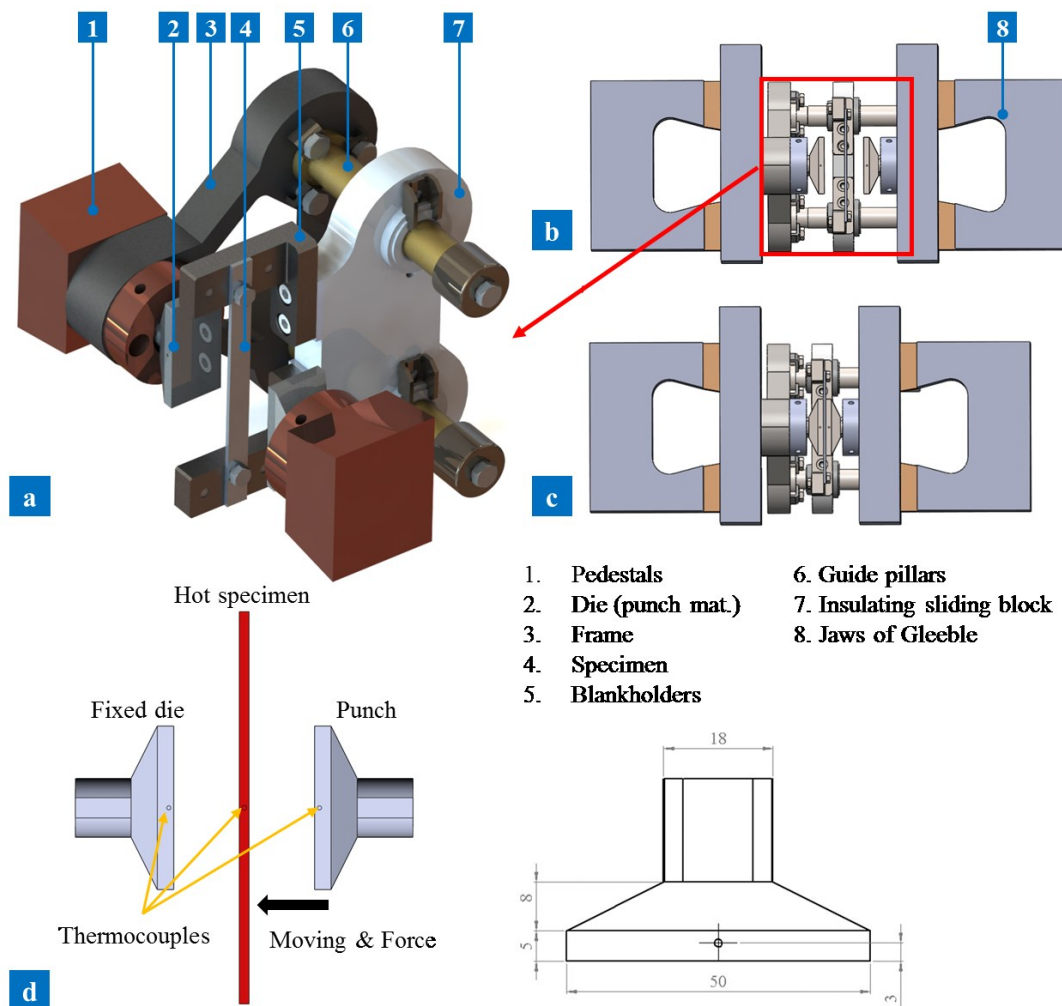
(a) Structure of IHTC-mate 2.0; (b) The IHTC test under unloading conditions; (c) The IHTC test under loading conditions; (d) Schematic diagram of the compression between the specimen and tools, and geometry of the tools.
